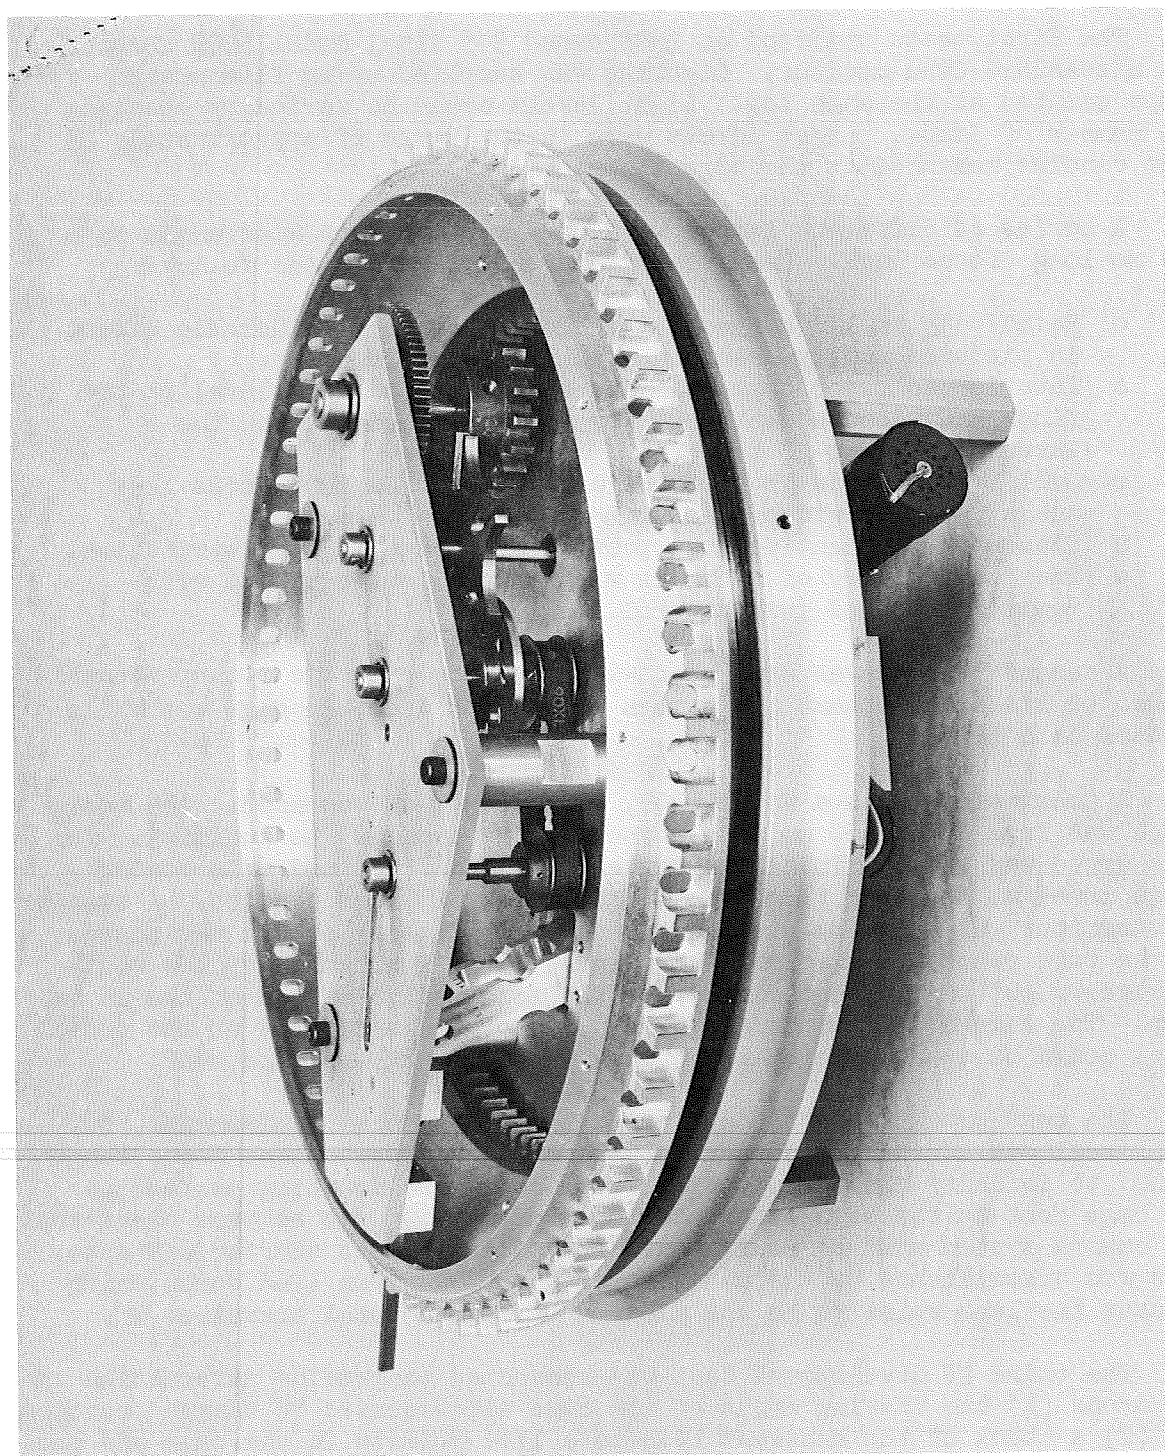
Assembled Feeder Mechanism Sideview With Cone Removed
